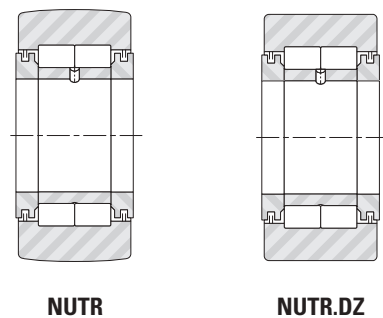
Yoke-type track rollers with end washers, full complement of cylindrical rollers
